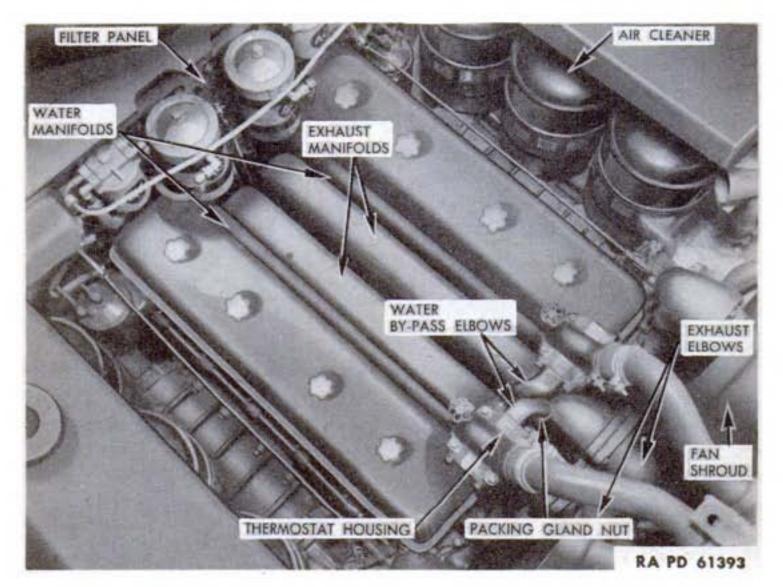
Top View of Engines Showing Water Manifolds and Connections
